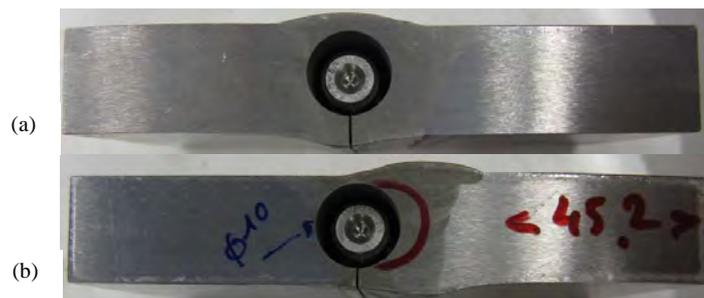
Machining of specimen in the weld (a) and the buttering (b) metal
